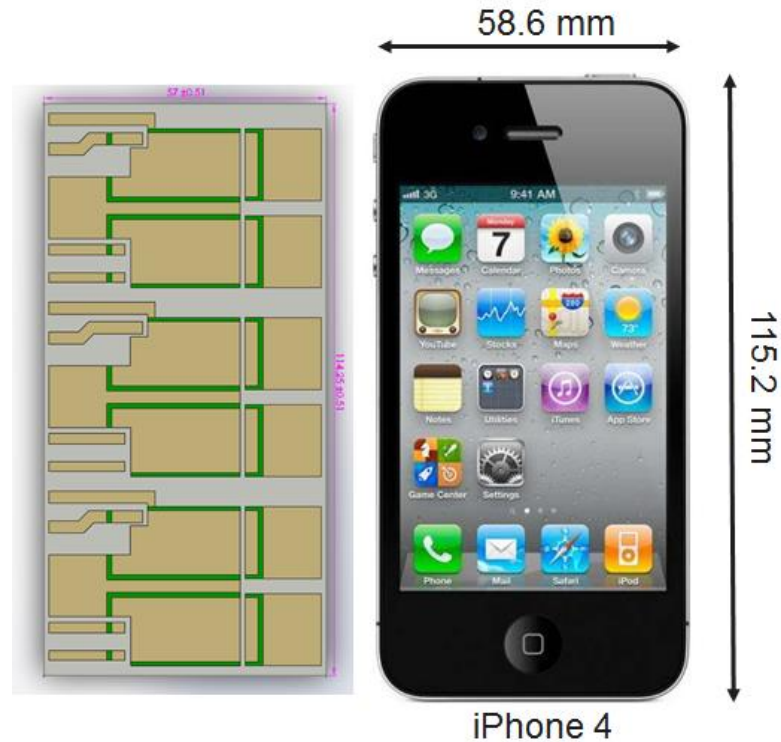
Bottom side DBC layout design of a 3-phase double sided cooled inverter.
